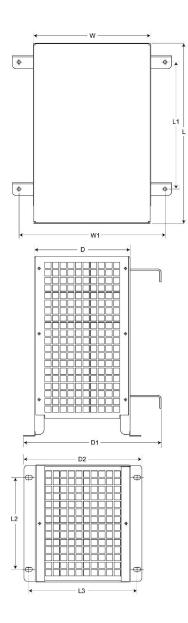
Dimension drawing of braking resistor, frame sizes FSC / FSD / FSE / FSF
